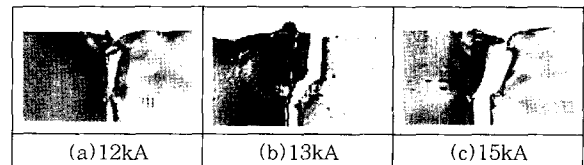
Fracture shape by variation of welding current in 2-point welding.(200kgf, 10 Cycle, ELL : 5mm)
